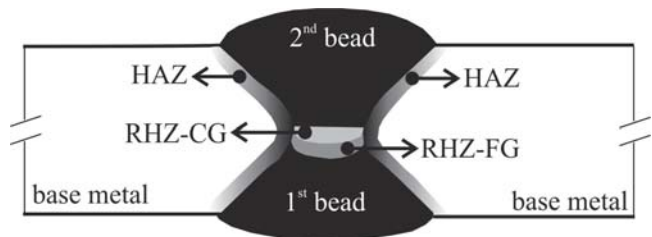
Schematic representation of a double-sided weld joint obtained with the submerged arc welding processes
